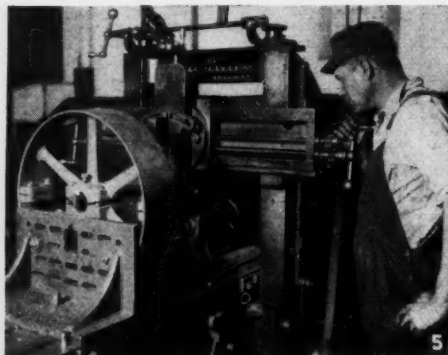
Cutting a keyway in a pulley for a fly frame. Fig. 6—Machining the back for a replacement bearing. Fig. 7—Cutting teeth on a ratchet for a loom.
